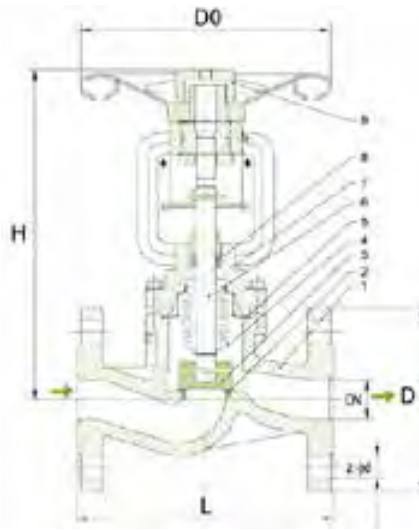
Bellows Sealed Globe Valve (Flanged)
